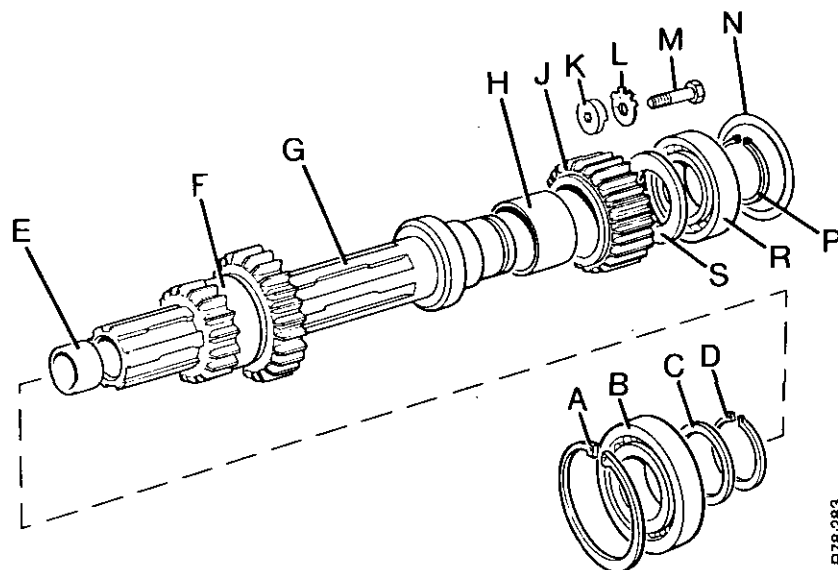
TOP-SHAFT ASSEMBLY 1210 TRACTOR
